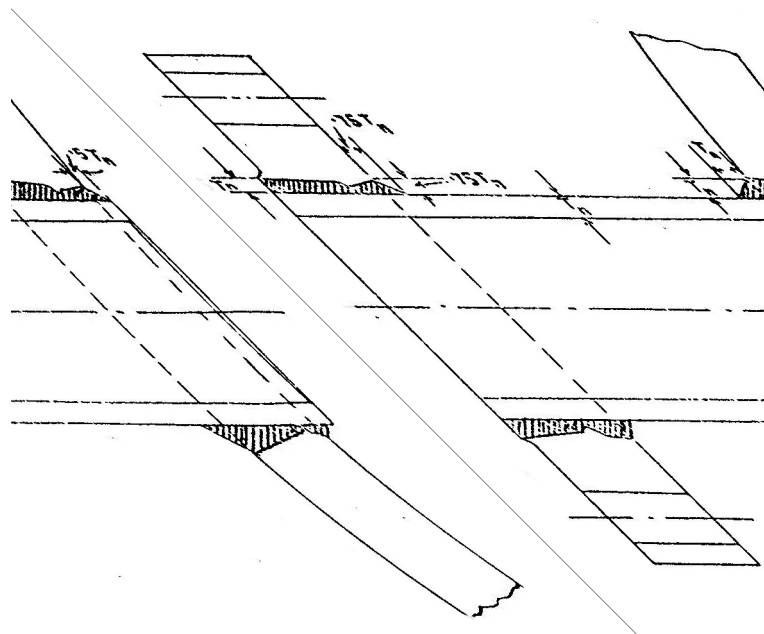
Minimum weld attachments for stand pipes over 4 in. bore where a compensating ring is not required and minimum weld attachment of flange to stand pipes over 4 in. bore.
